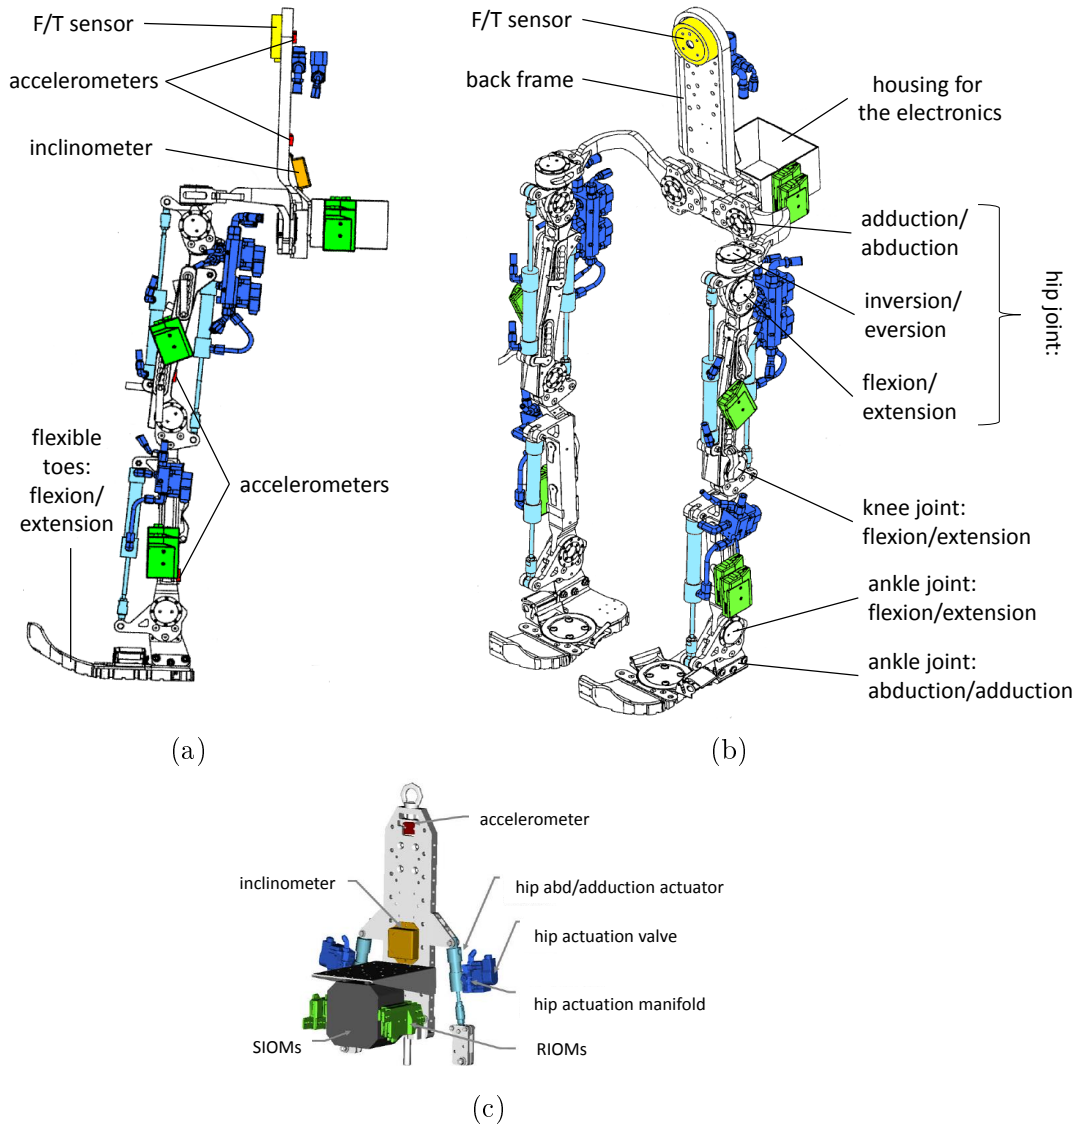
Schematic drawings of BLEEX: a) side view, b) perspective view (adapted from: [15]), c) torso back view (version with abduction/adduction hip actuator). (adopted from: [13]). Exoskeleton parts: hydraulic actuators (light blue), manifolds, valves and hosing (dark blue), remote input/output modules (green), force/torque sensor (yellow), accelerometers (red), inclinometer (orange).
